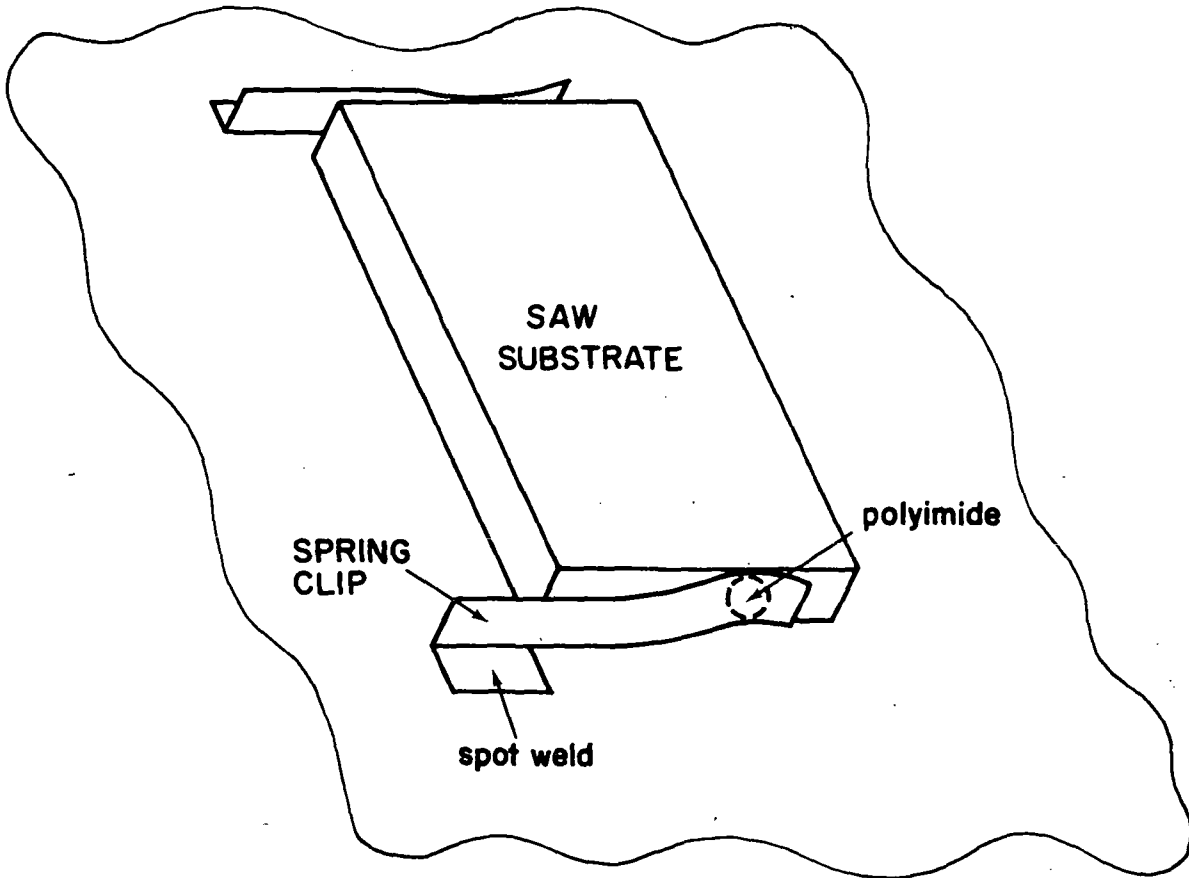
Illustration of Mounting Technique Using Spring Clips and Polyimide Adhesive.
